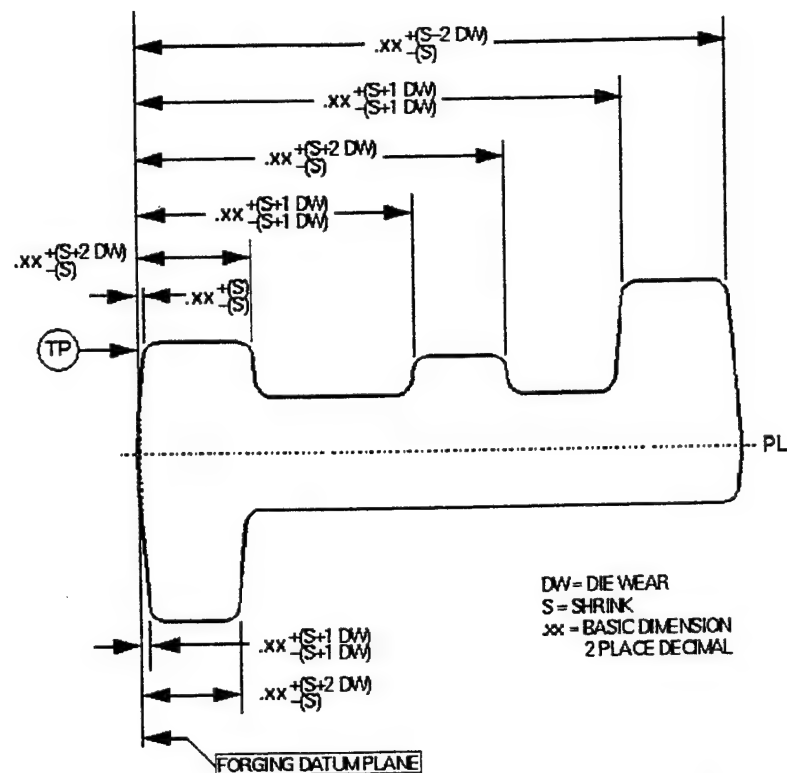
Shrinkage and Die Wear Tolerance Application for a Small Forging with Datum Plane on Periphery
